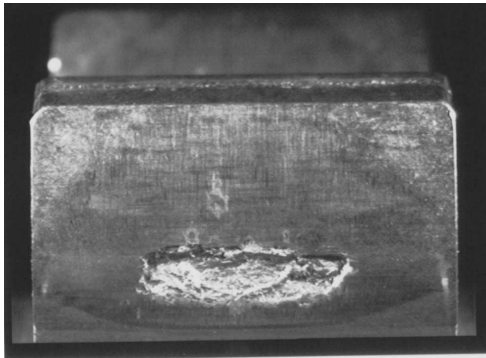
Typical pitting damage on a gear flank of the gears type FZG-C-PTX.
